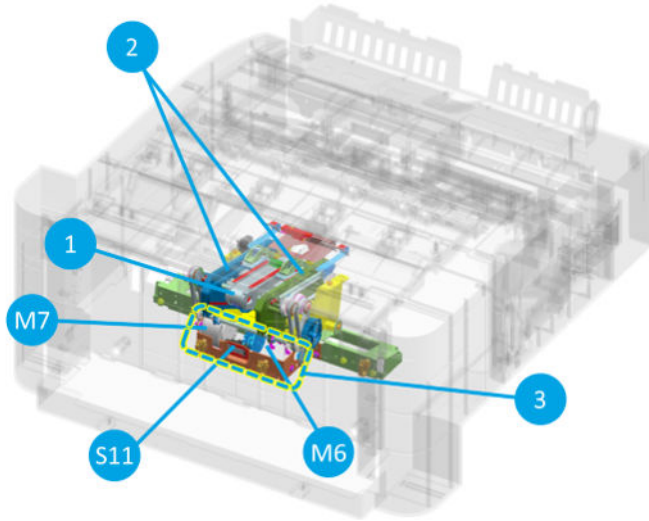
Inner finisher system - ejector unit detail view (1/3)
